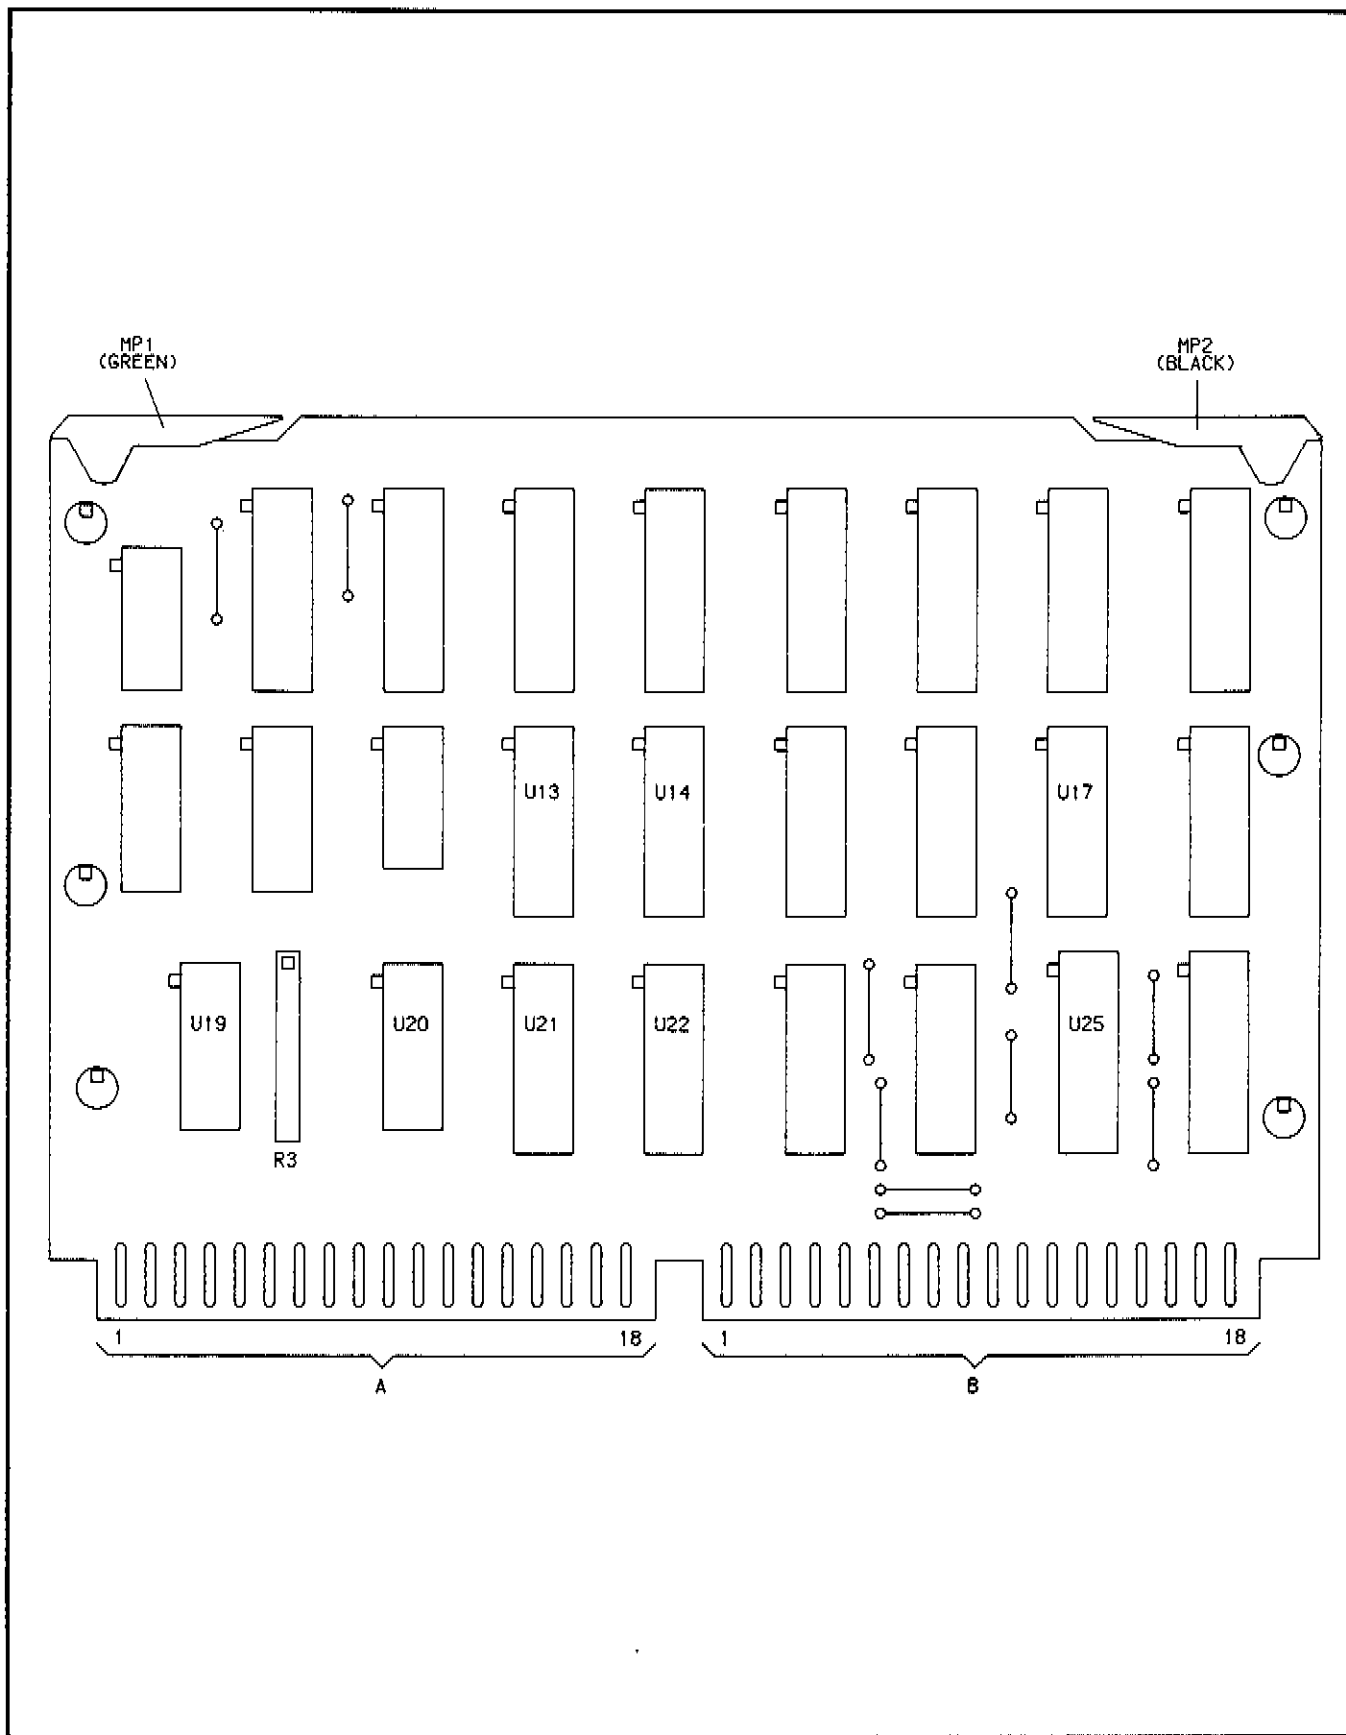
P/O A2A5 Frequency Control Assembly Component Locator
